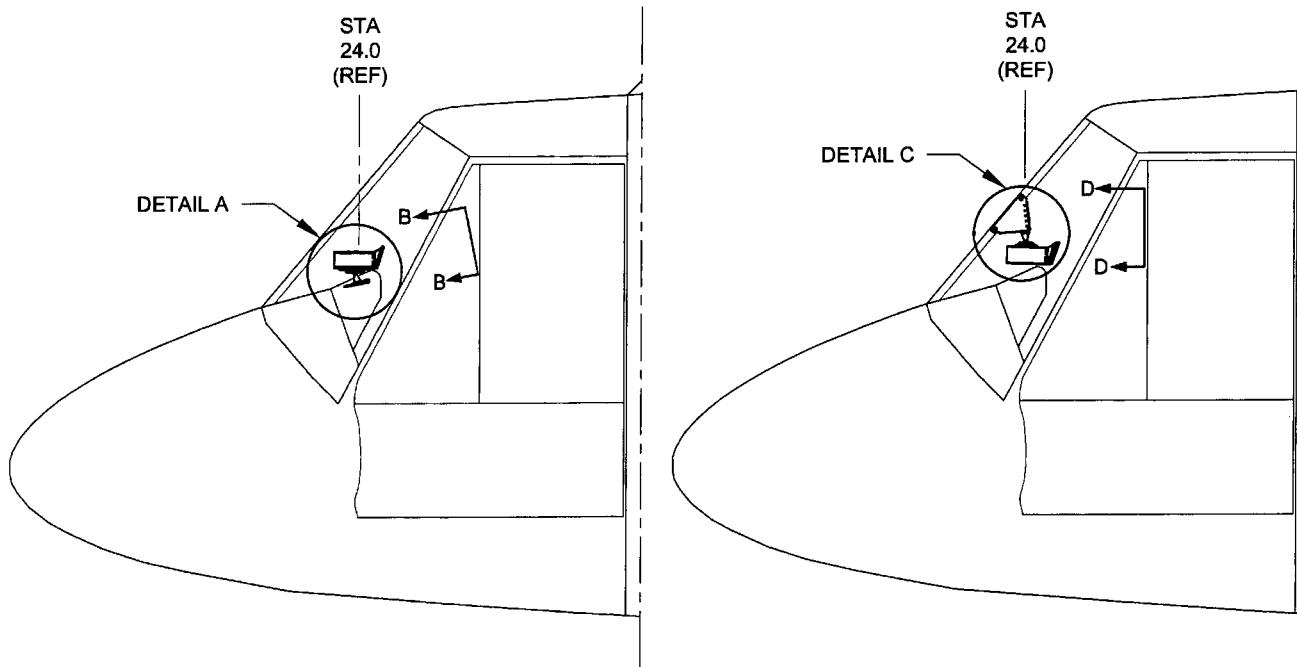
D412-758-011 Bottom Mounted GPS Gimbal Mount
